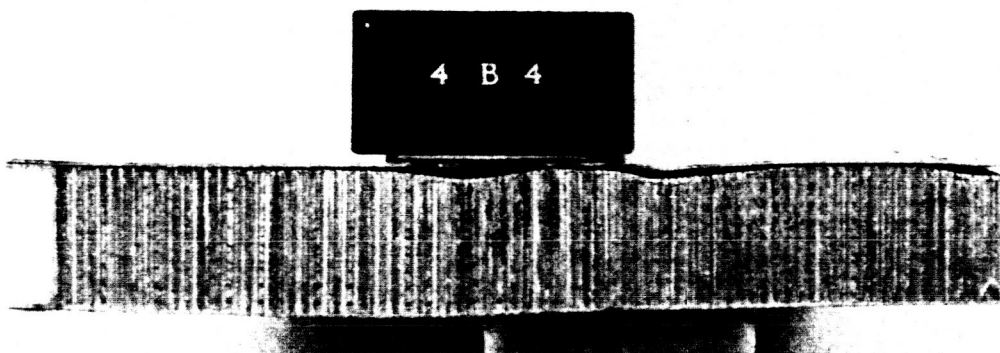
Sectional view 4B4 of aluminum-plate honeycomb-core panel after hailstone impacts
